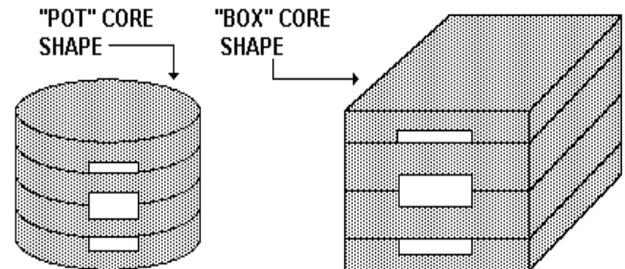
Typical form factors for “stacked” PIM assemblies, illustrating typical locations in the core “pieces” for accessing PCB winding terminals.
